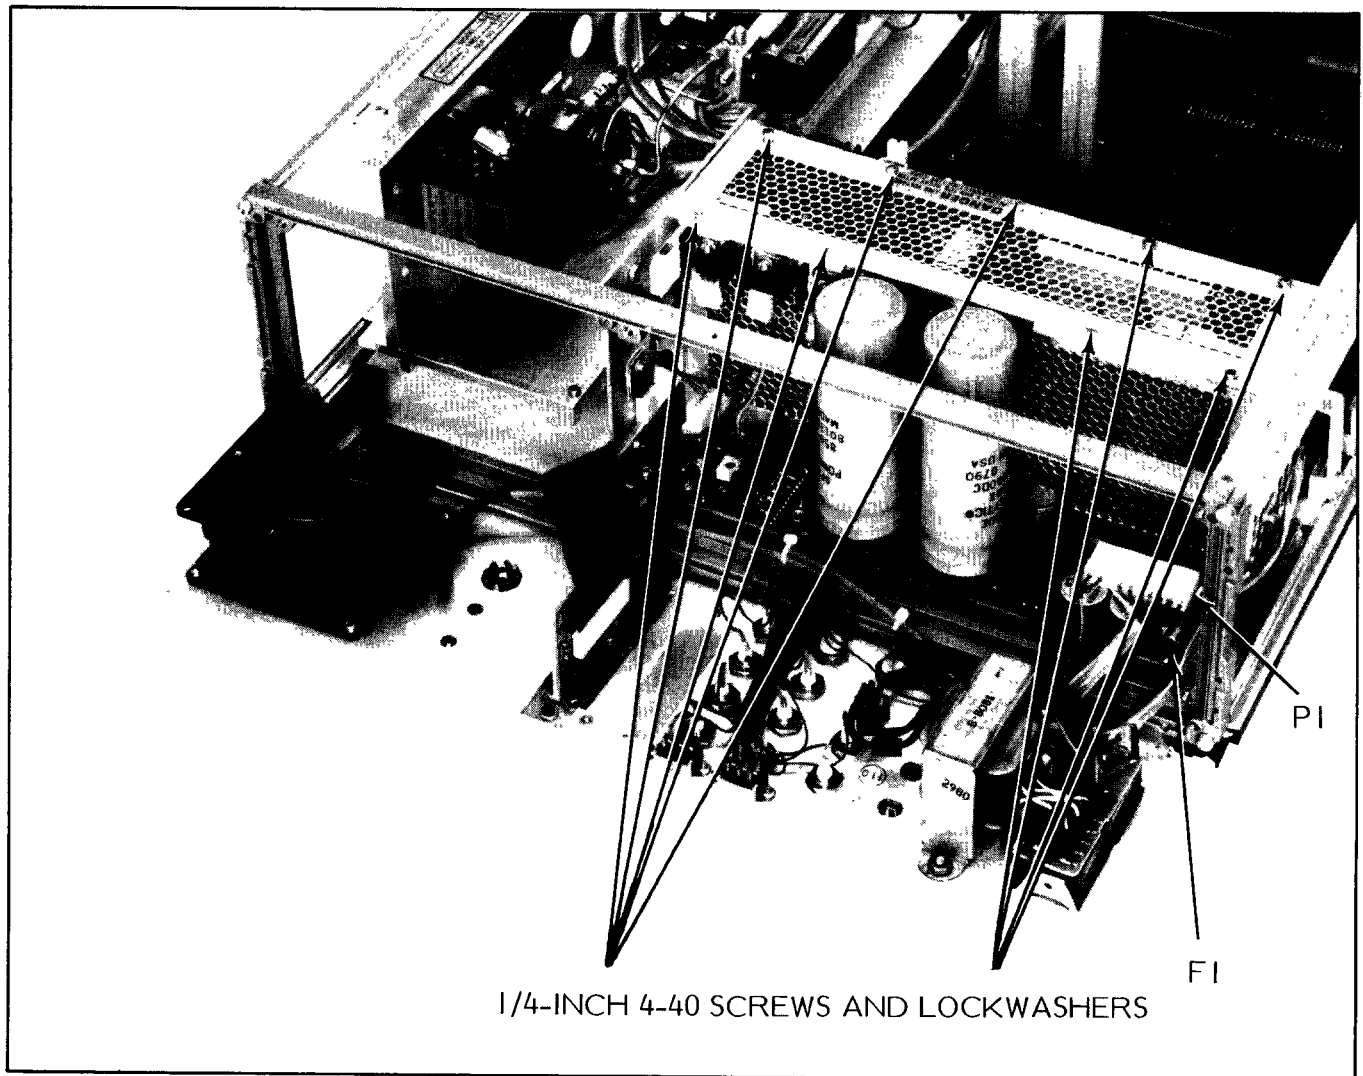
6600 Series Programmable Sweep Generator, Rear Quarter Panels and Assemblies
